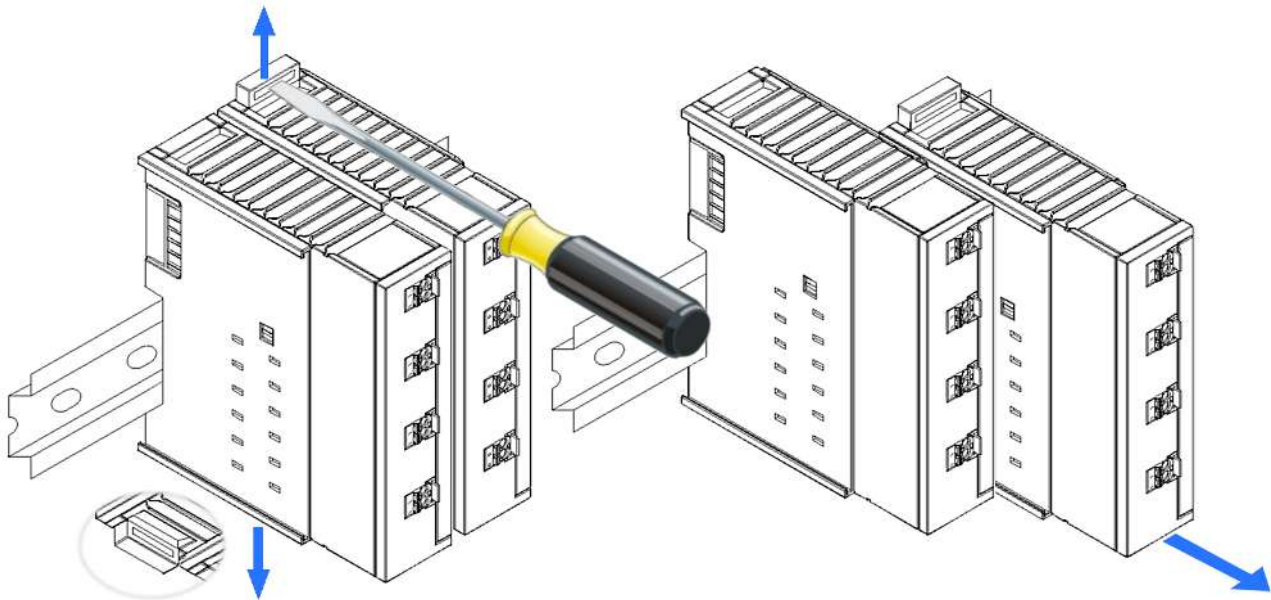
Opening of the upper and lower mounting rail lock and pull out the ELM terminal module
